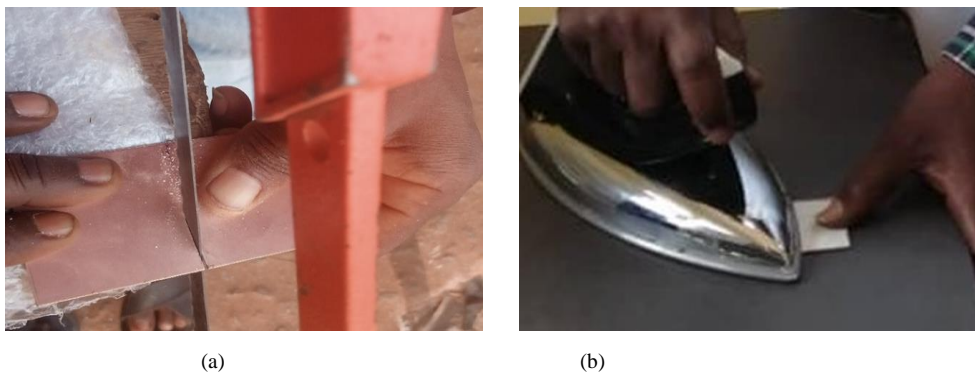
Fabrication Process (a) Cutting and milling of Substrate and (b) Masking of sized substrate.
